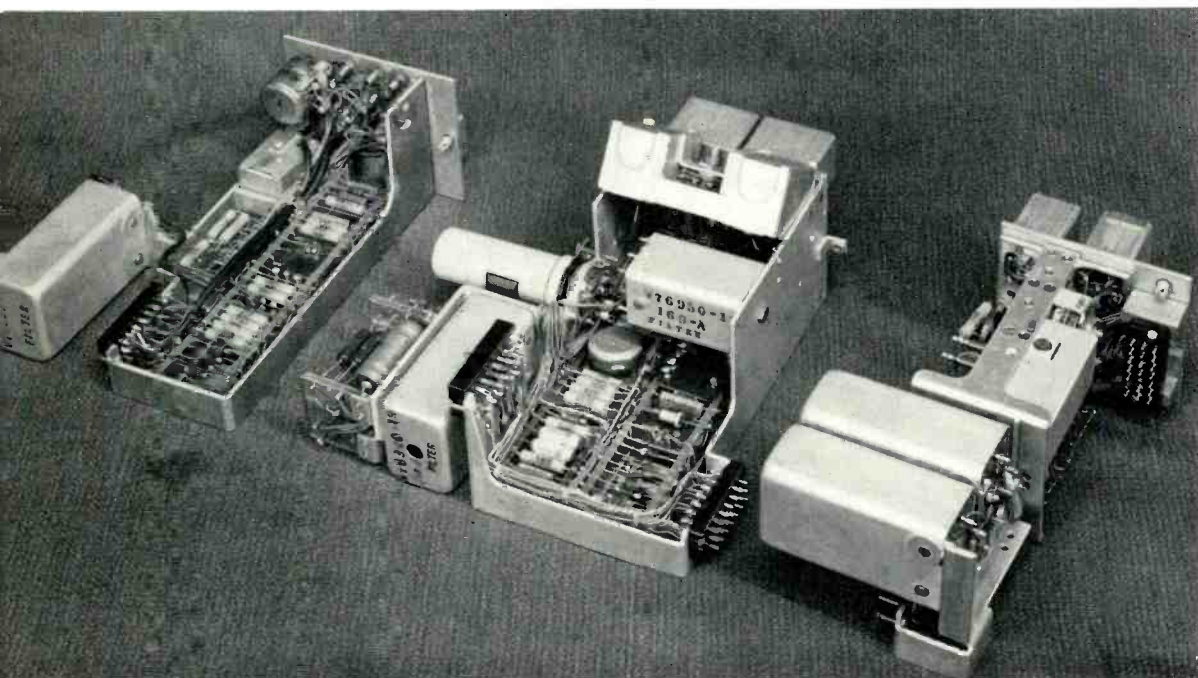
Channel Unit Sub-assemblies. On the left is the compressor; center, the expander and signaling sub-assembly; and on the right is the carrier sub-assembly.
